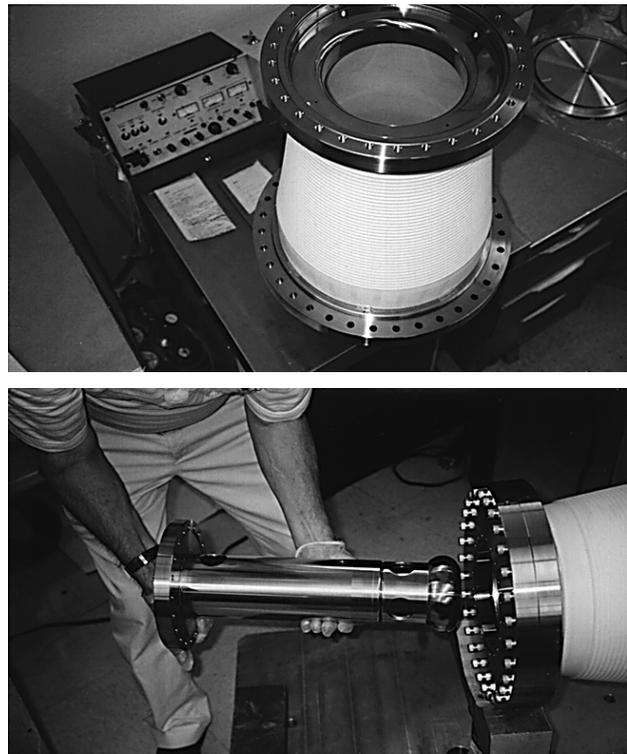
Upper View - HV Ceramic Insulator; Lower View - Installing the Focus Electrode and Cathode/Heater Subassembly.
